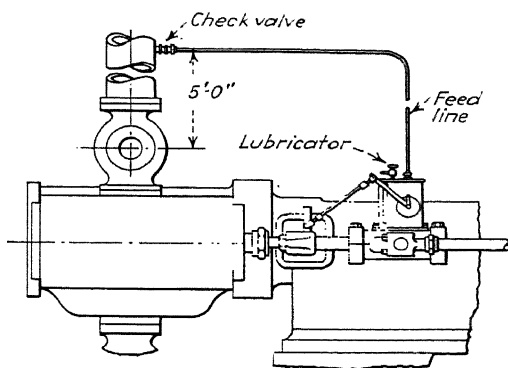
Proper method of installing an atomizer and lubricator on a single-valve engine.
